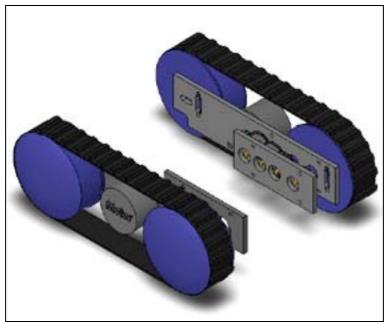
Motor is connected to the back wheel with a two speed gearbox
